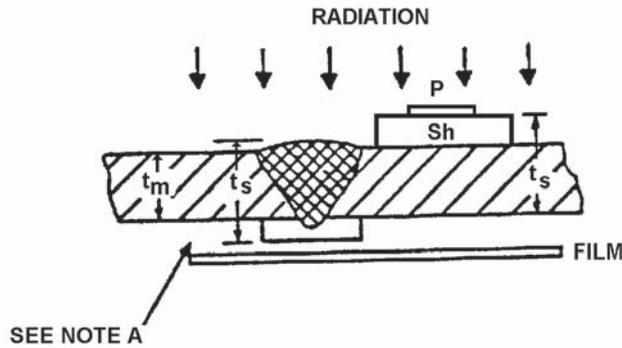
Examples of  $T_m$ ,  $T_s$ , and Penetrator Placement: Single Wall, Weld Reinforcement, No Back-Up Strip.
